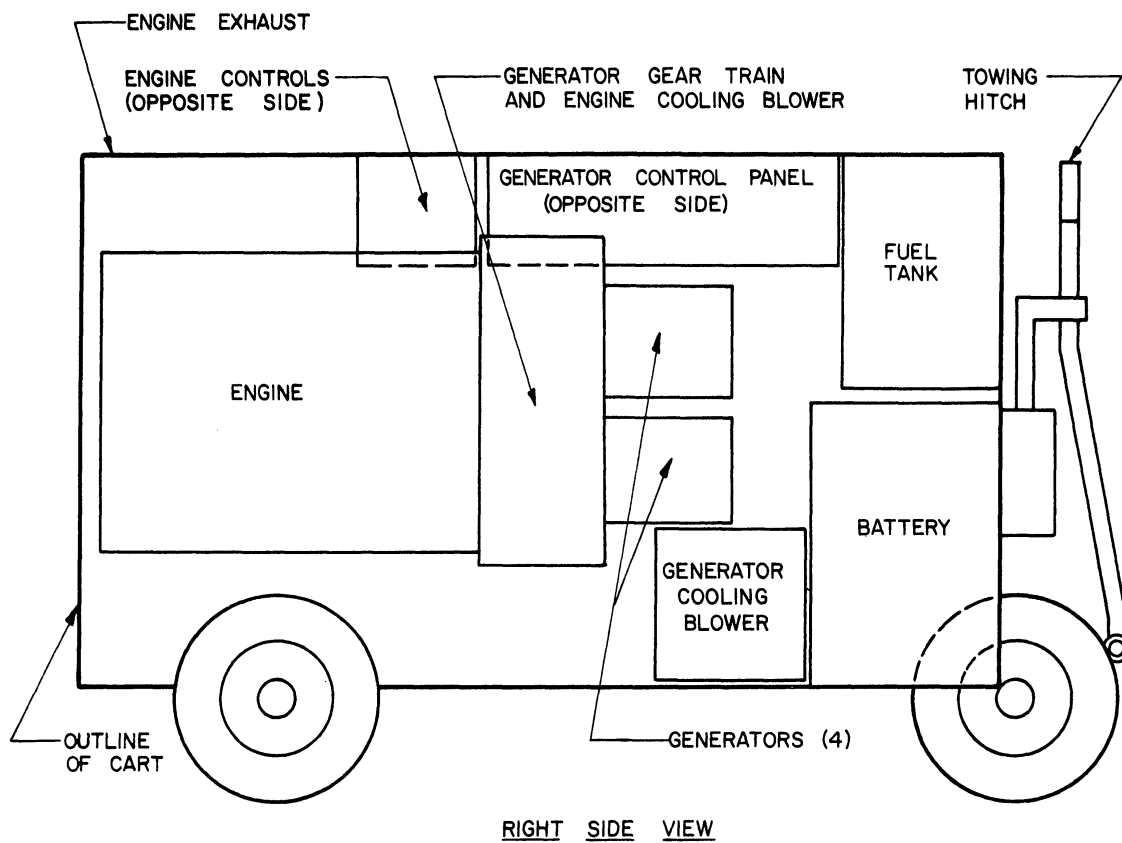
Schematic elevation of C-26 interior arrangement.
